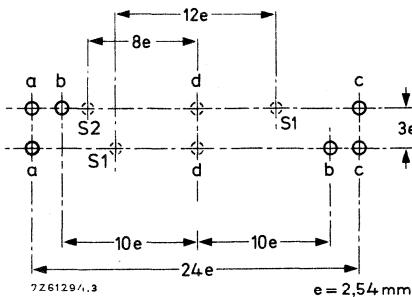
Hole pattern in the printed-wiring board for a tandem potentiometer (viewed on component side).
